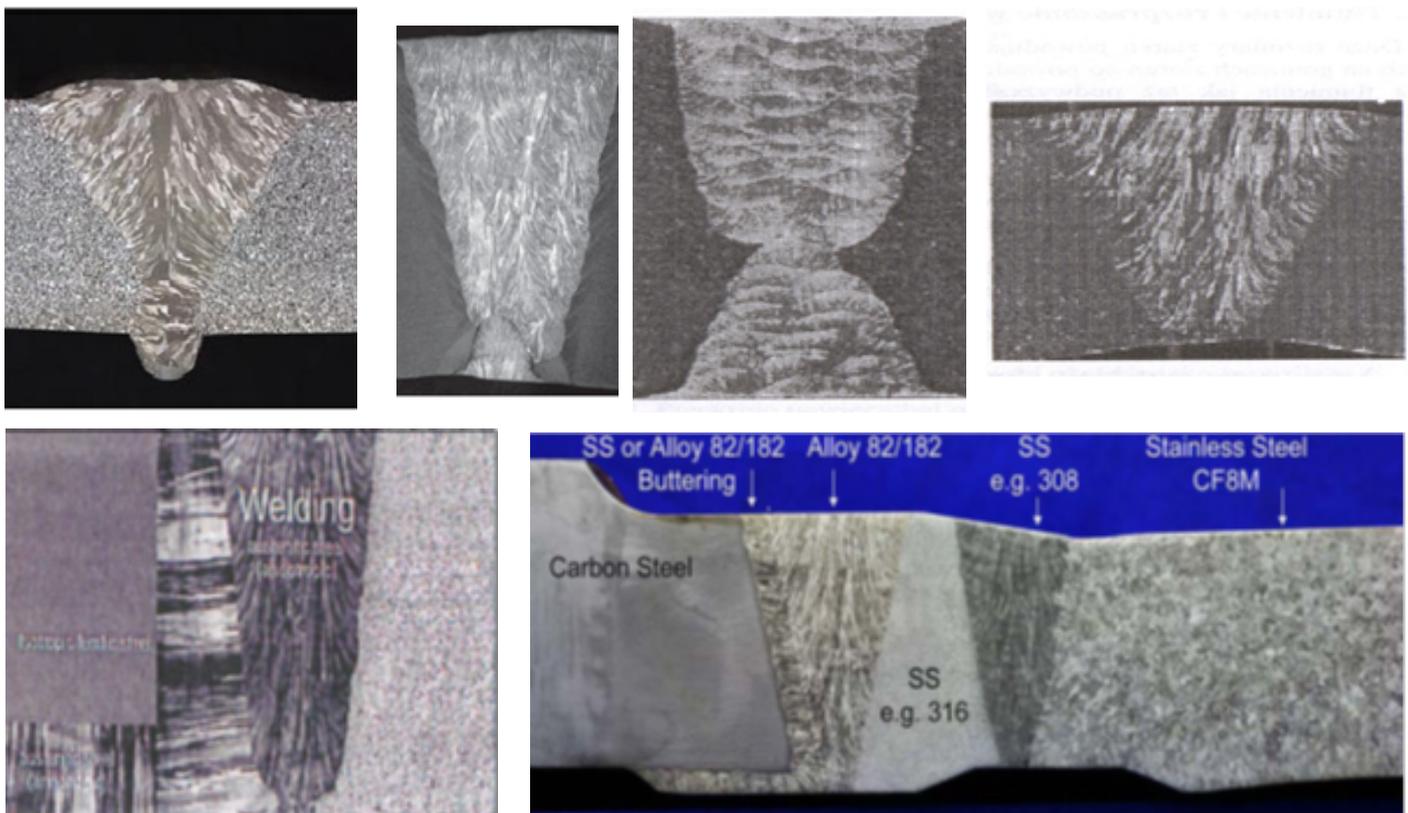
Weld in the similar joint (a), coarse-grained structure (b) and dissimilar material weld (c)
